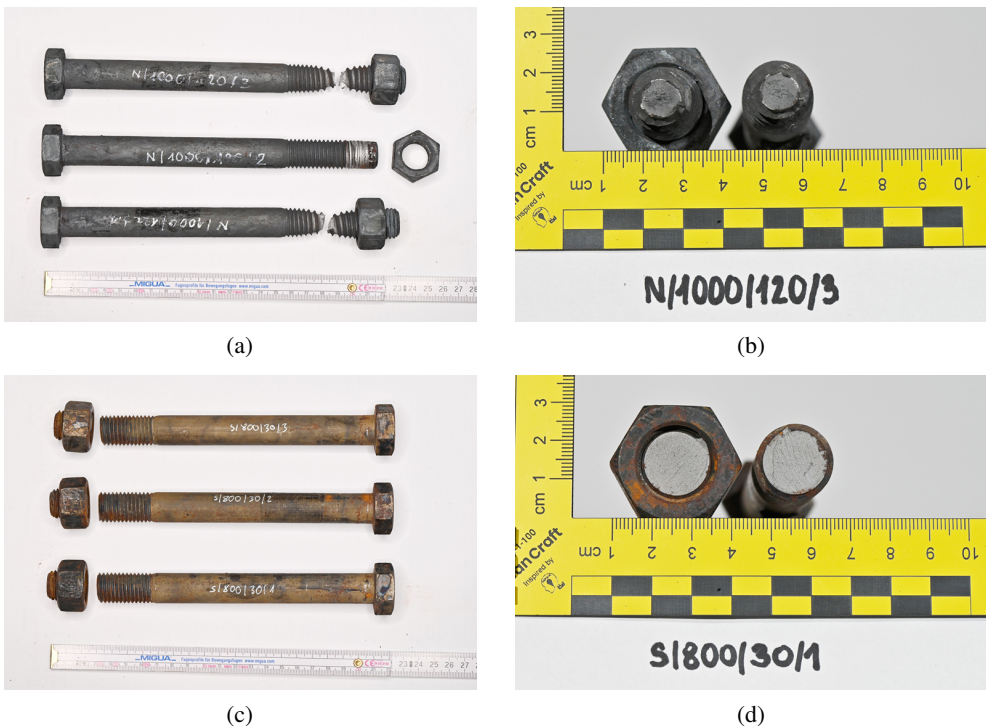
Examples of damage to tension bolts: (a) – (b) damage by plastic rupture in the threaded part of the shank (bolts cooled in air) or by the thread shearing/nut slip, (c) – (d) damage by brittle fracture (bolts cooled in water)
